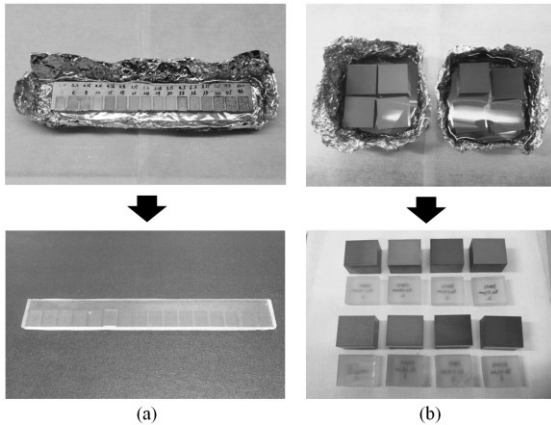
Photos of NAK80 molds and replicated silicone surfaces by using (a) DS-EDM and (b) WC-EDM
